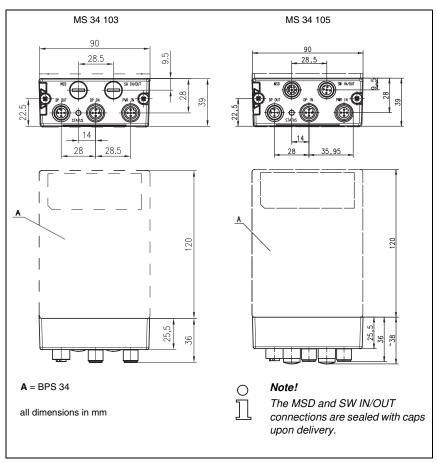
Dimensioned drawing MS 34 103 / MS 34 105
